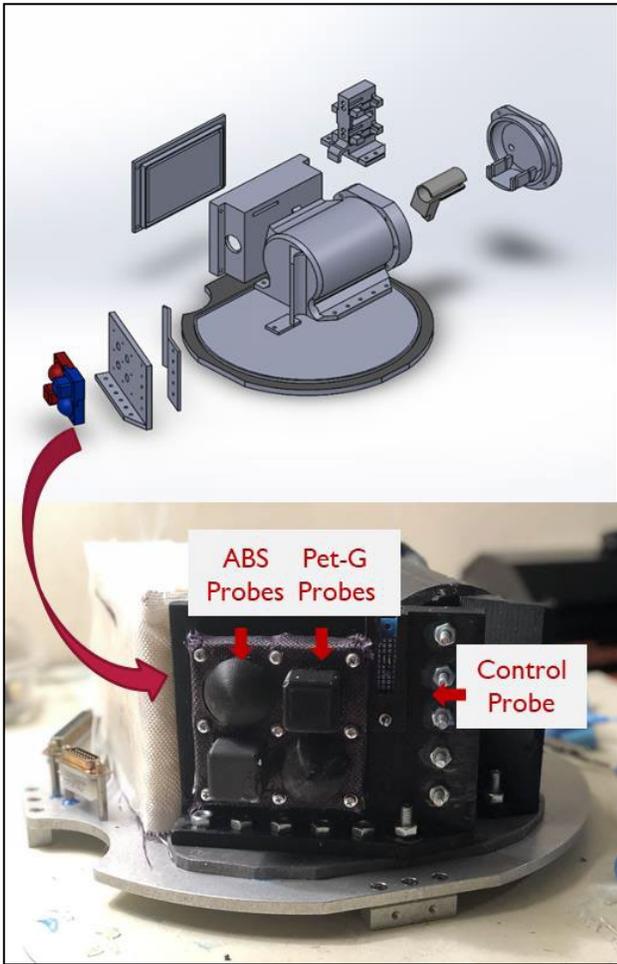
Exploded SolidWorks CAD of the payload and photo of the thermal sensor locations.
